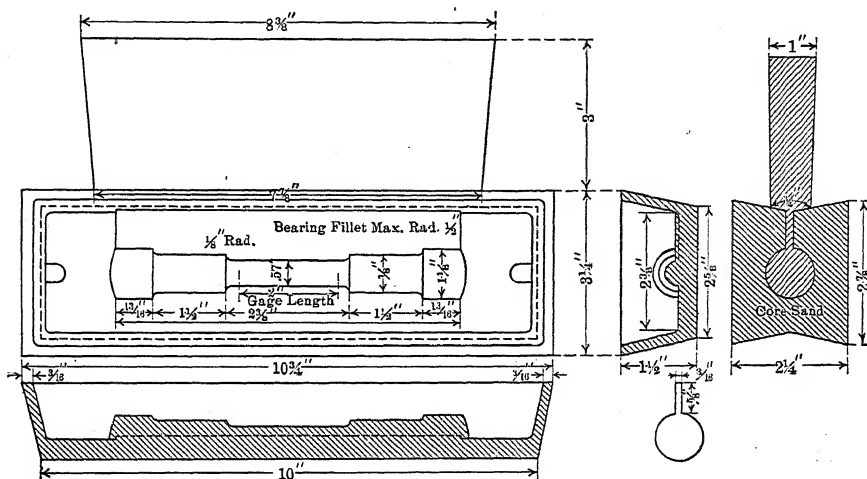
CORE BOX USED IN MAKING SHOULDERED TEST BARS.
